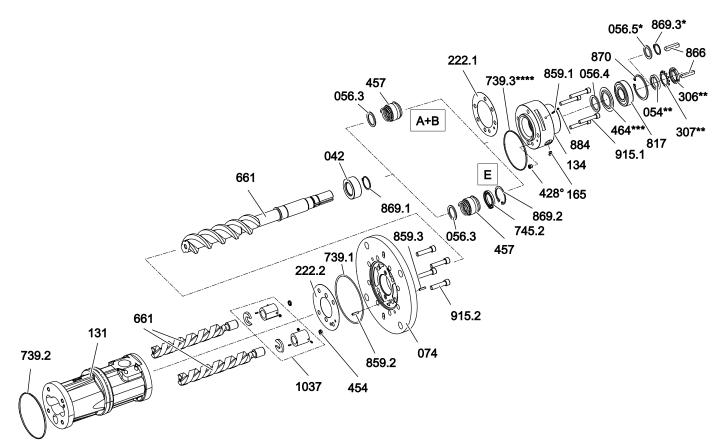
Spare parts CLE 32-42, 55-660, CLE 880
